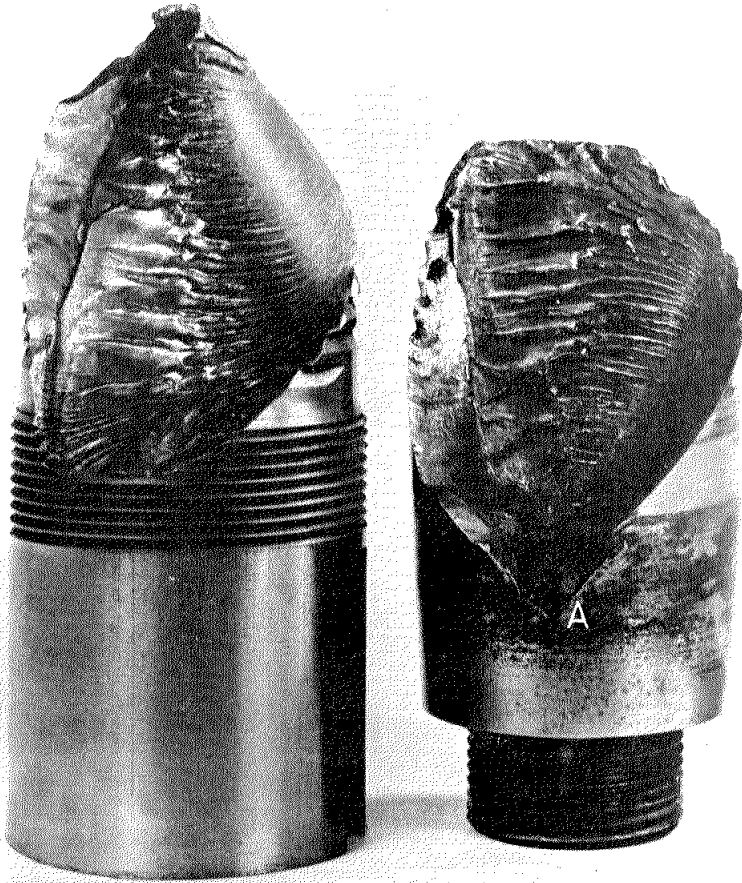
Torsional Fatigue Failure in Shaft. Fracture initiated in area of fretting corrosion at point A under a hub assembled at this point.
